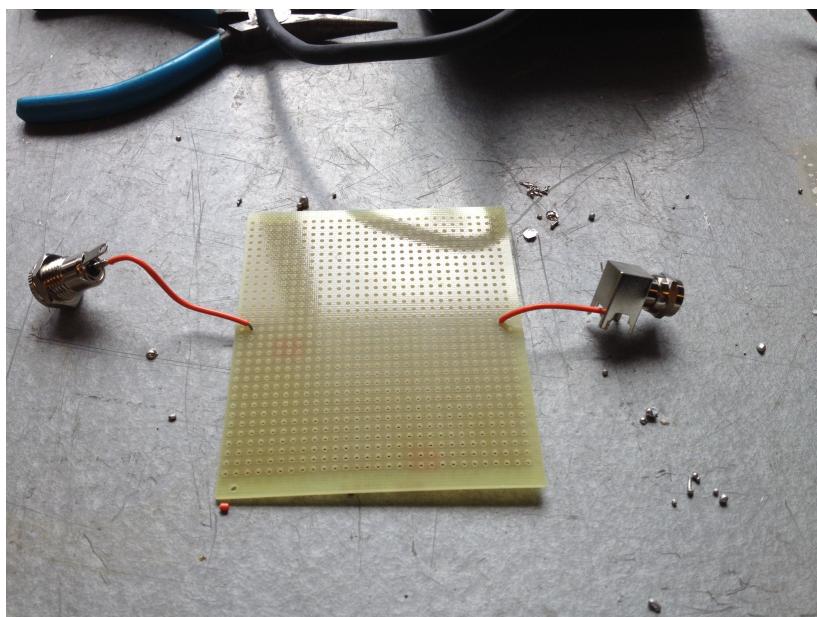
Assembly of dc jack connector to f type coax adapter. Solder middle pin of dc plug connector to perf board. Solder middle pin of f type plug connector to same conductive strip of perf board.
